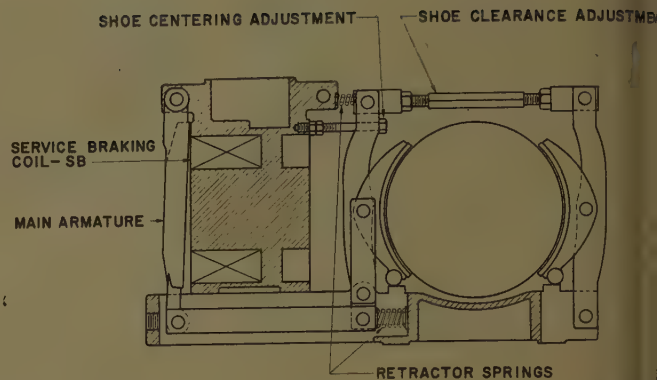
Controllable torque portion of brake with frame and magnet sectioned
